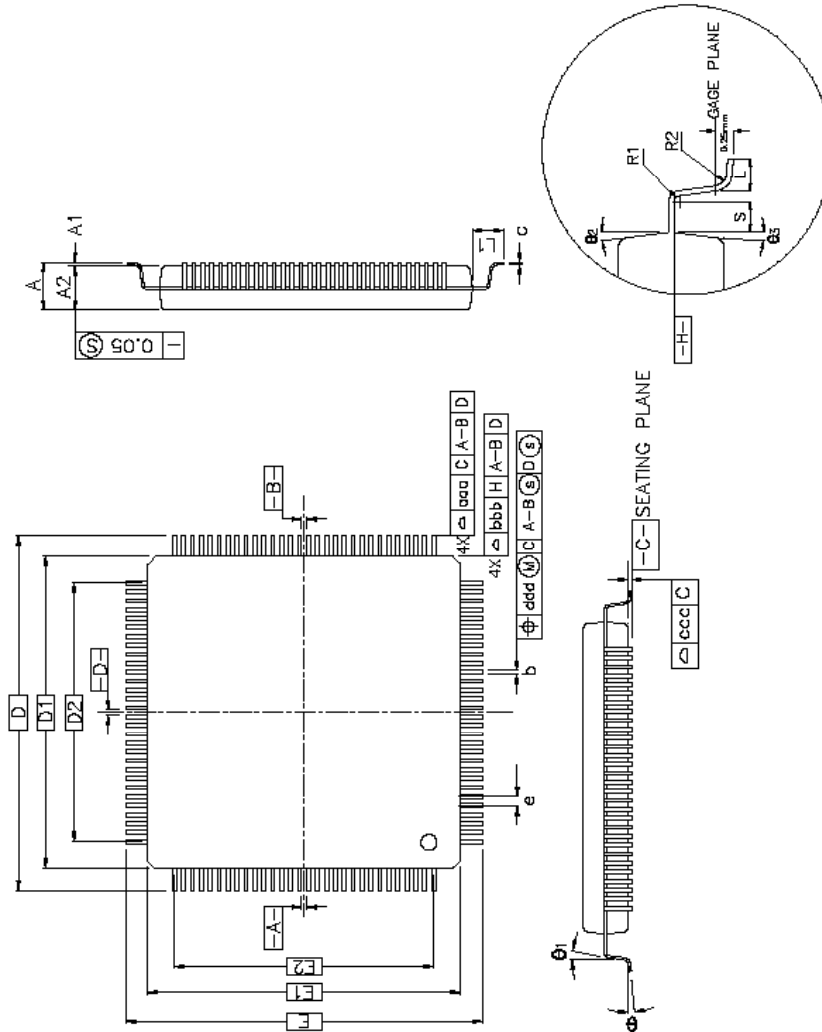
gm5221 208-pin PQFP Mechanical Drawing
